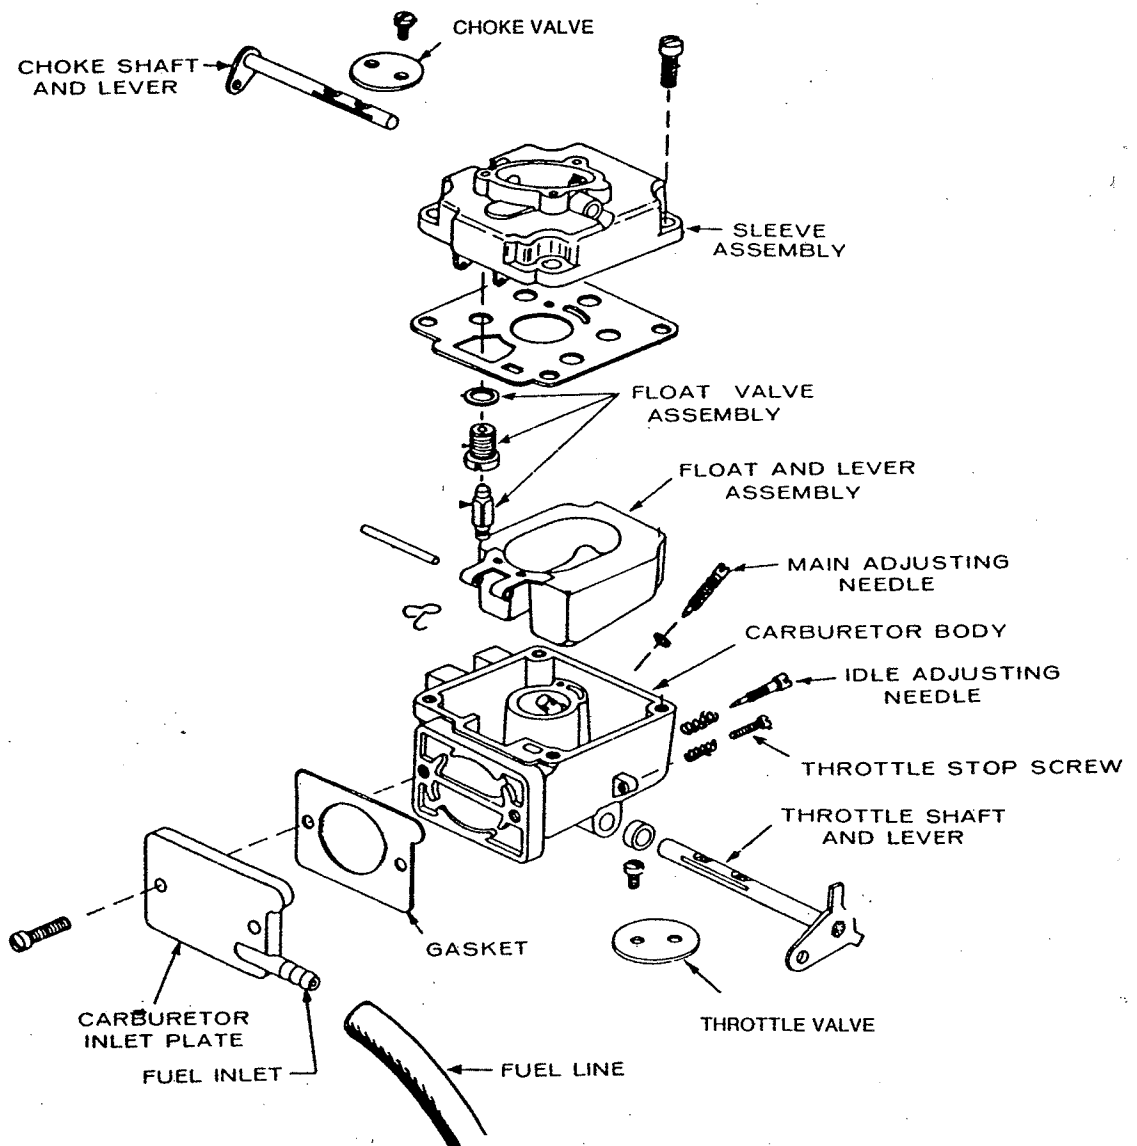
EXPLODED VIEW OF CARBURETOR
